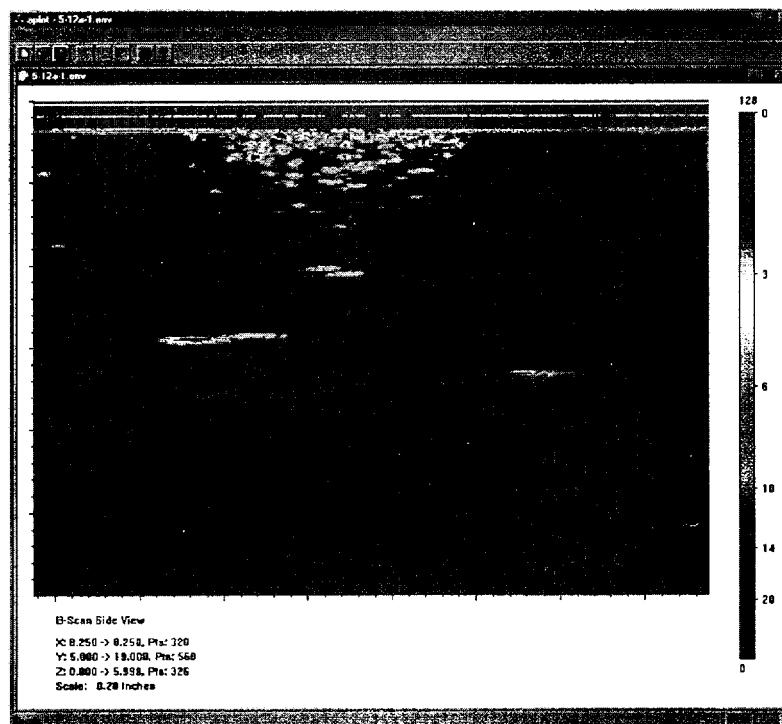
SAFT-UT Image from Ultrasonic Inspection Normal to Weld
